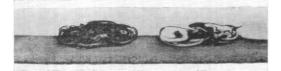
Weld between stainless steel and Nimonic 75, showing inadequate mixing.
